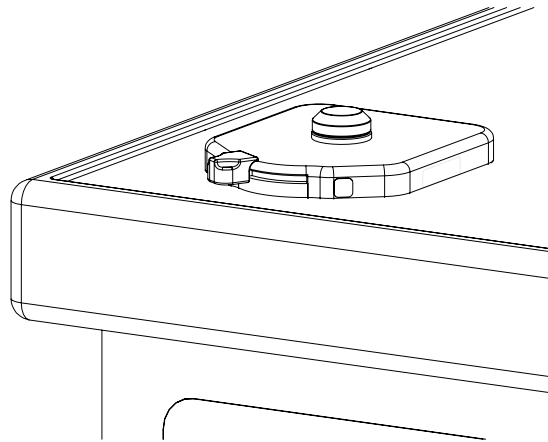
Installation of the Universal Mounting Base on a counter top/crash cart
